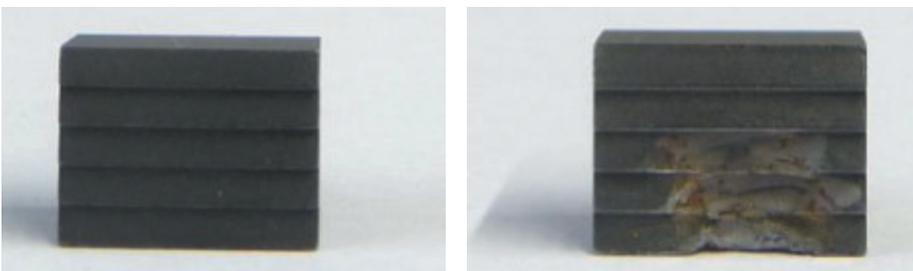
One of the conventional inserts before milling (left) and after completing the milling process (right)
